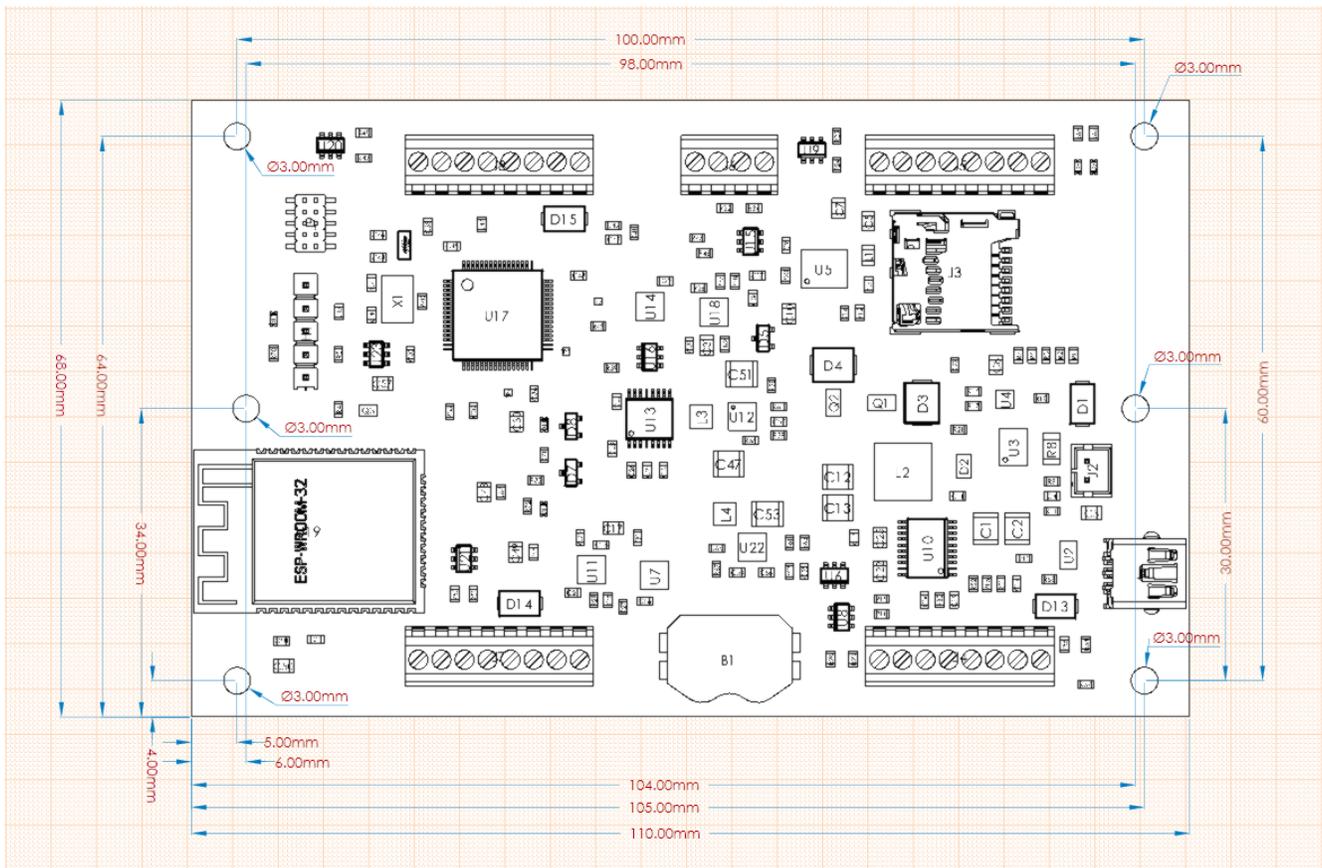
DATALOGGER 222 SIZE AND MOUNTING DIMENSIONS
